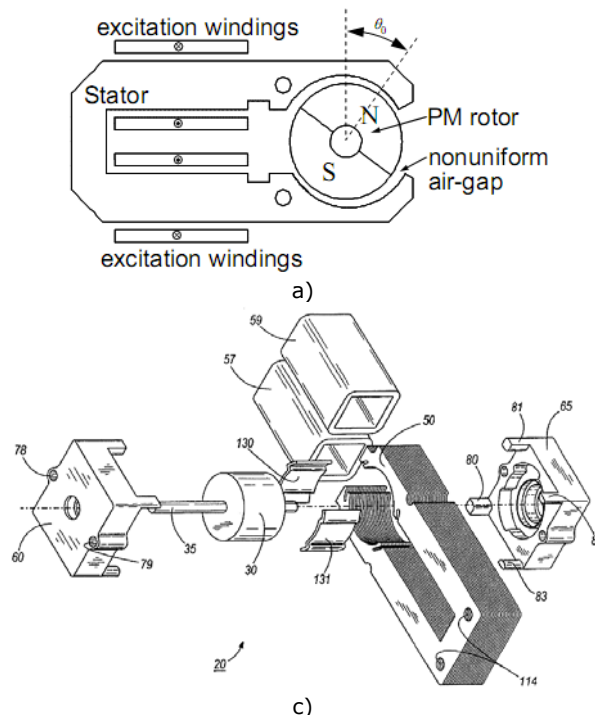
The U frame stator: a) the self-starting geometry with tapered airgap, b) Component parts assembly [23]
